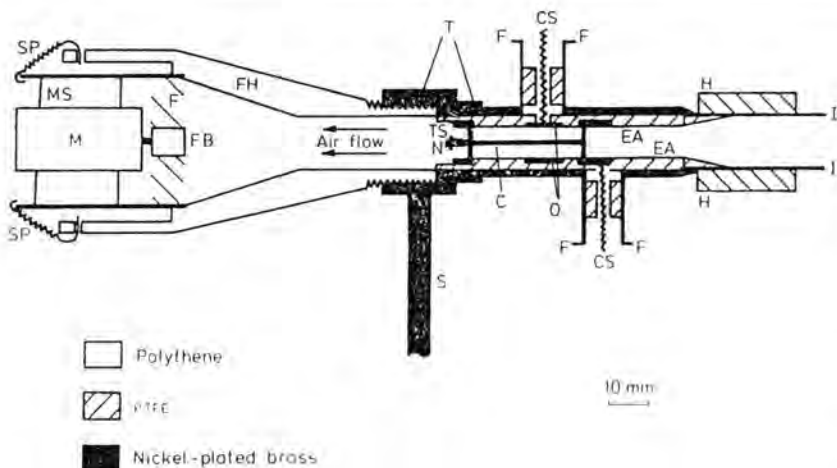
The ion collector: sectional drawing. SP, motor retaining spring; MS, motor support; M, fan (F) motor; FB, fan boss; FH, fan motor housing; T, threaded section; S, support pillar; TS, N, central electrode (C) tensioning spring and retaining nut; O, outer electrode; F, BNC socket mounting flange; CS, contact spring; EA, PTFE electrode assembly carrier; H, heater (12 W); I, inlet tube.
